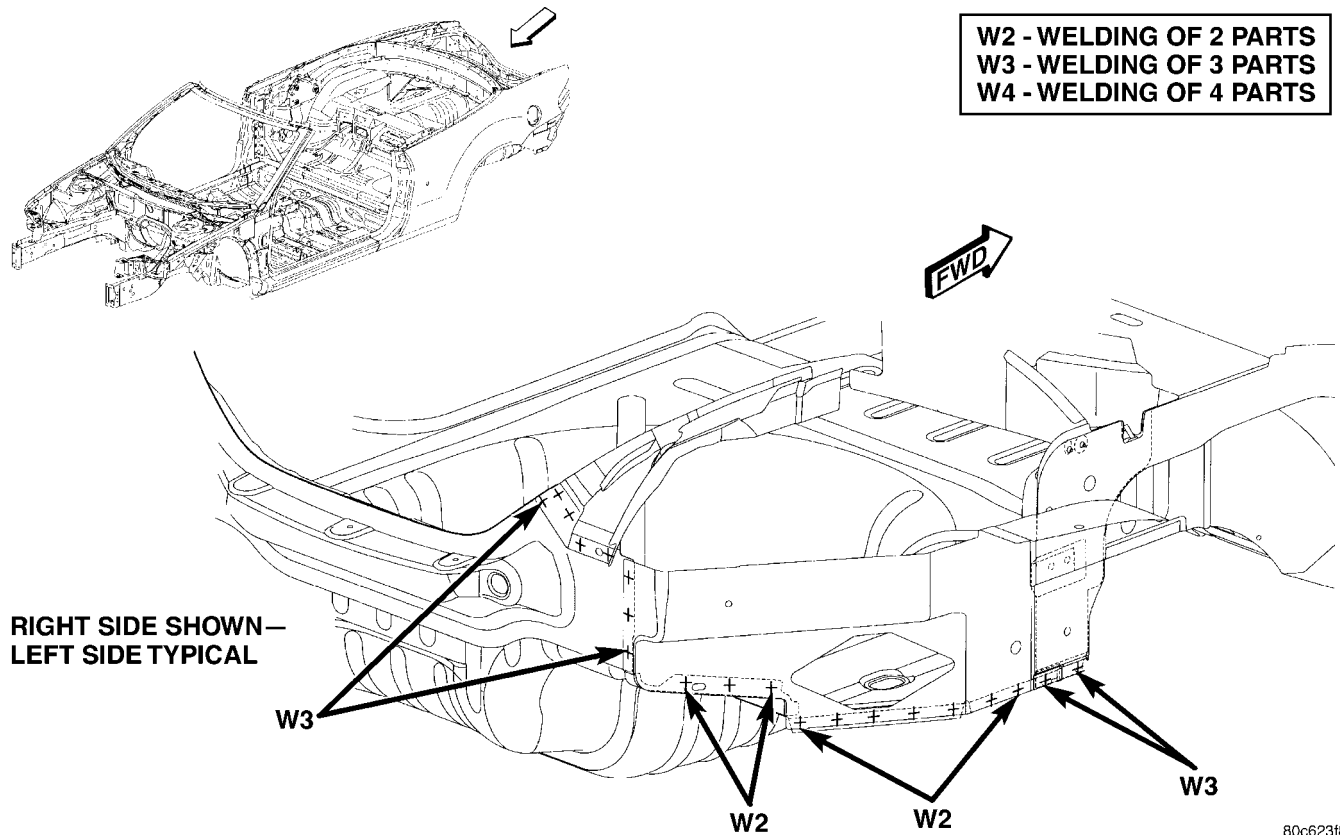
REAR INNER QUARTER PANEL TO INNER WHEELHOUSE EXTENSION TO FRONT INNER QUARTER PANEL
